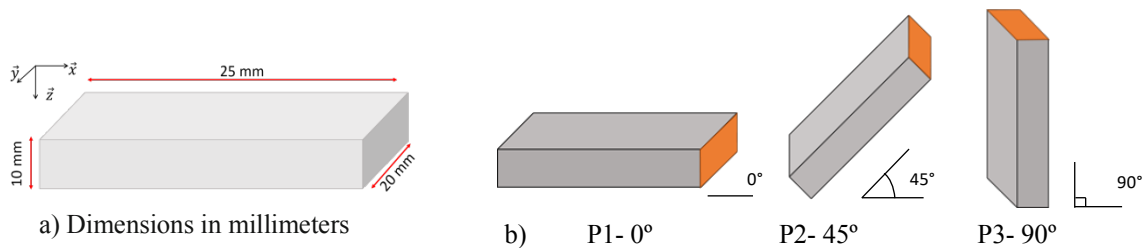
Test part dimensions and building: a) Geometry b) Build direction.
